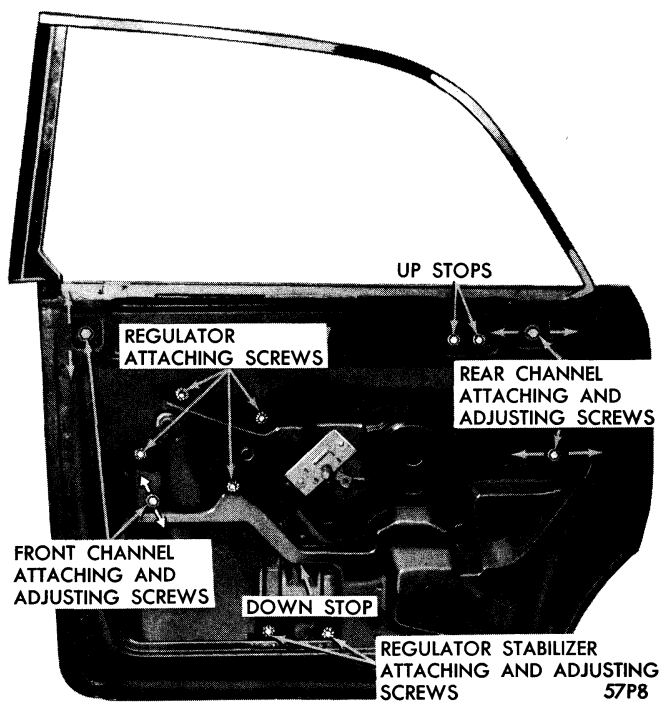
Rear Door Glass Adjusting and Attaching Screws
